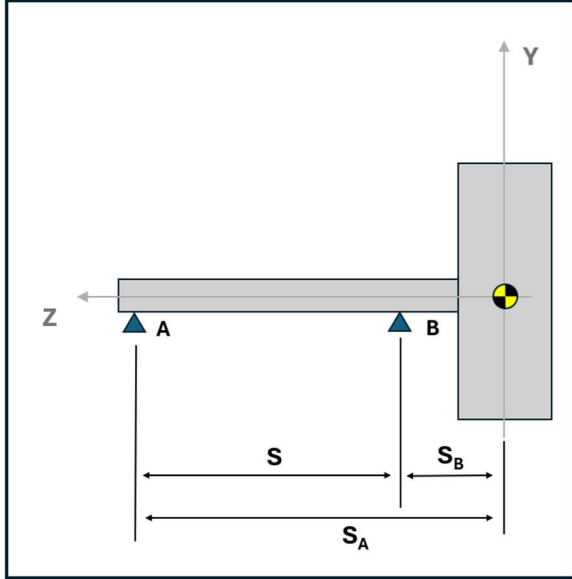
General case for a rotor cantilever mounted outside of the bearing supports
